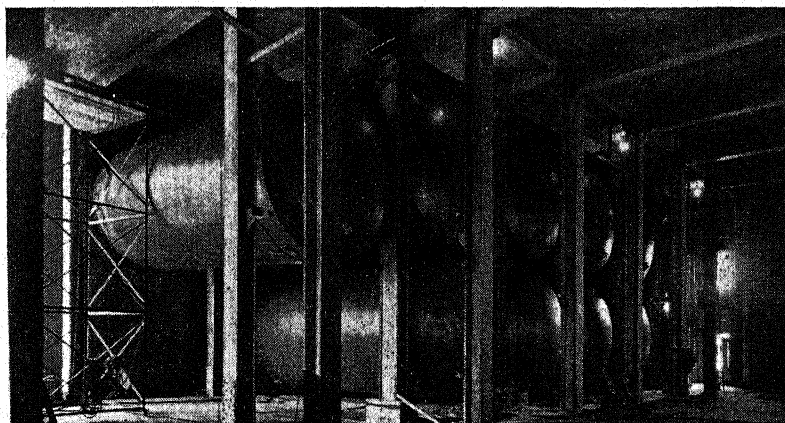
Arc welded glass-lined stock tanks.
